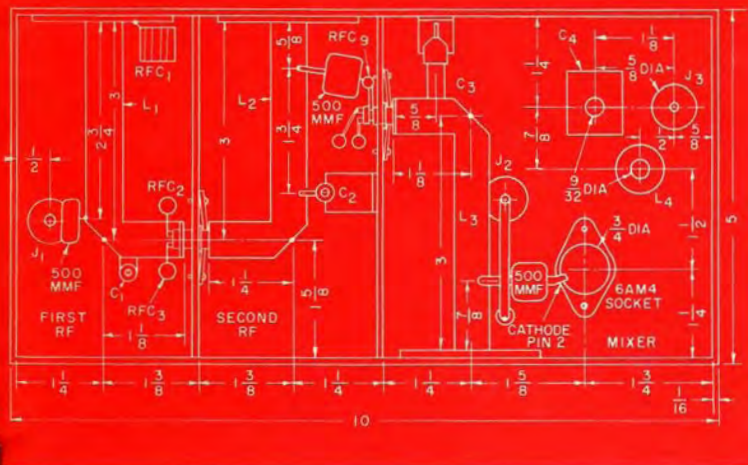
CHASSIS LAYOUT DIAGRAM for the 432-megacycle converter. Over-all dimensions and positions for taps on L_1 , L_2 and L_3 are shown. Note that a side view of the oscillator injection coupling loop, L_1 , is included in the mixer compartment portion of the diagram.
